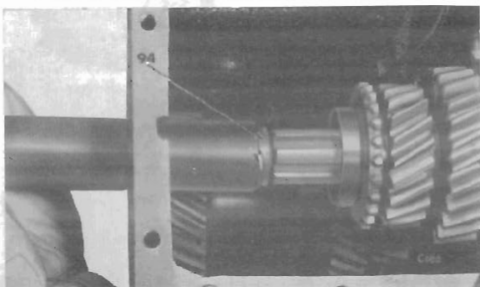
Using Churchill tool S.145 to install the mainshaft circlip
